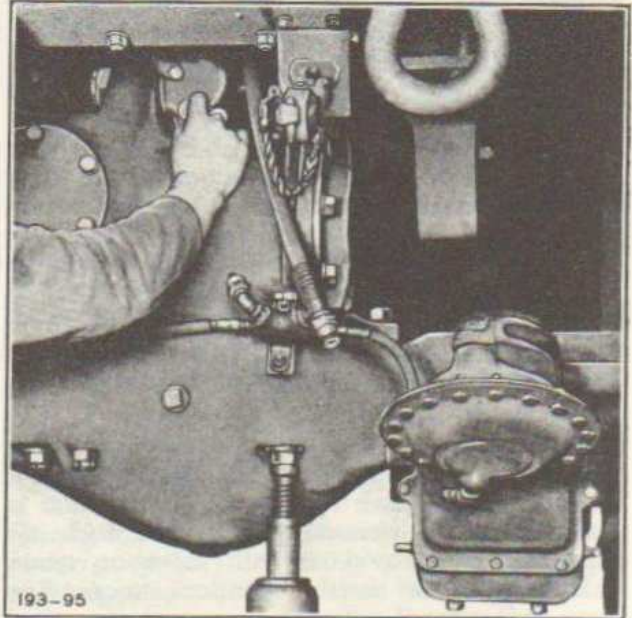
Installing Rear Torque Rod Ball Socket Cap
